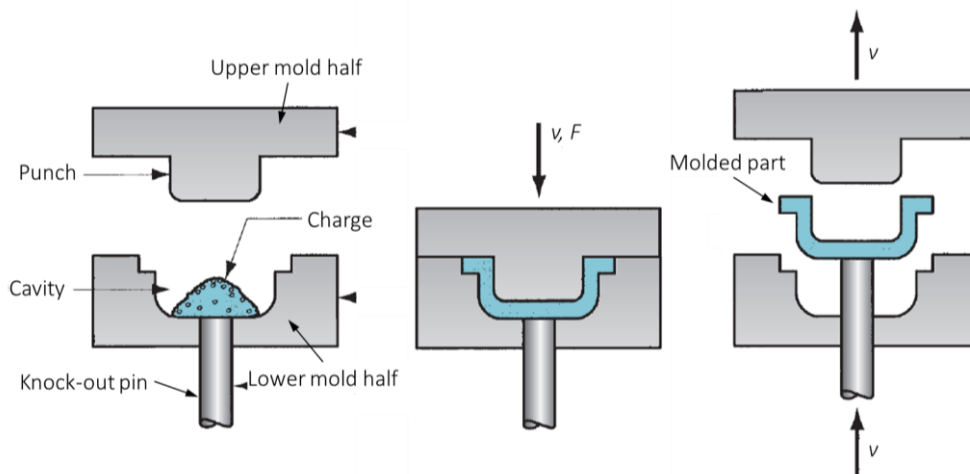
COMPRESSION MOLDING PROCESS (MIKELL P. GROOVER, 2010)
